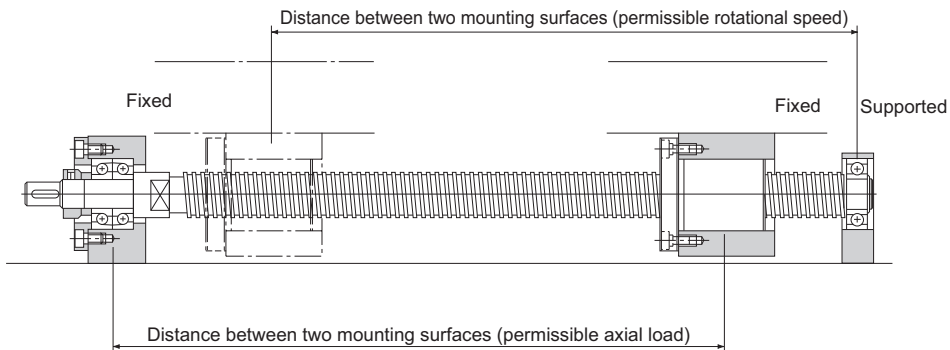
Screw Shaft Mounting Method: Fixed - Supported
